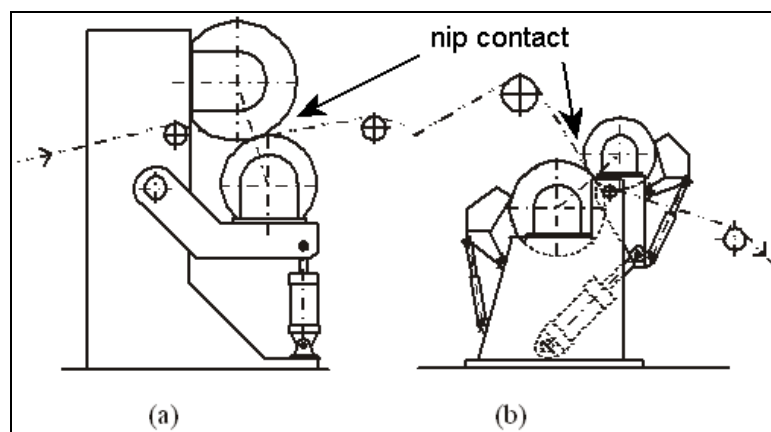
a) Calender nip and b) coater nip of a paper machine (Keskinen 1998).
